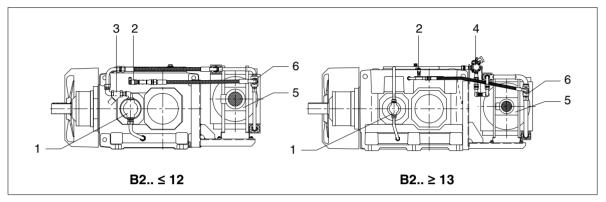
Air oil-cooling system on gear units types B1.. and B2..
